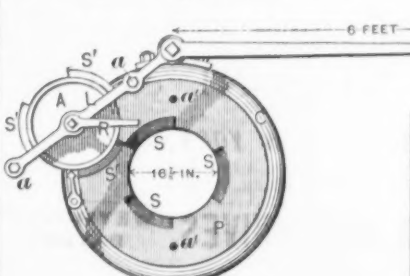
End View of Gun, Showing Breech Plug Removed.
